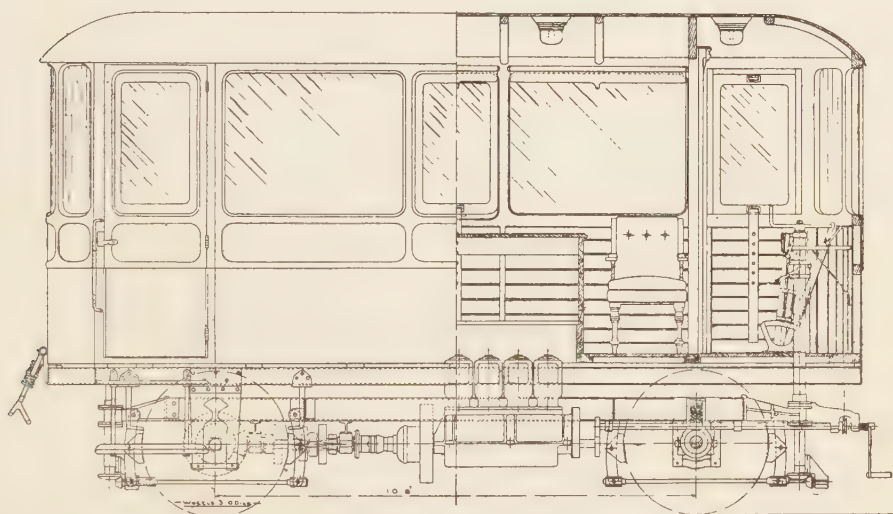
SECTIONAL ELEVATION OF N.E.R. RAIL MOTOR CAR.
